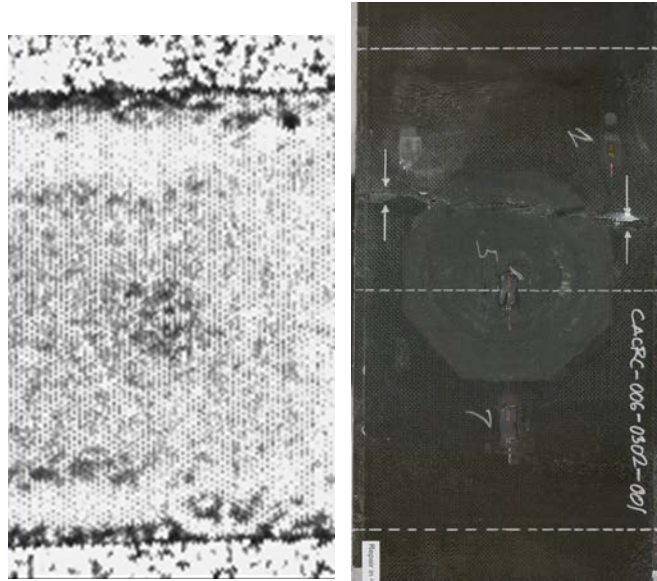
CACRC-006-0302-001-W-RC-ETW (element 24), TTU scan, pre- and post-test picture (facesheet compression failure through the repair)
